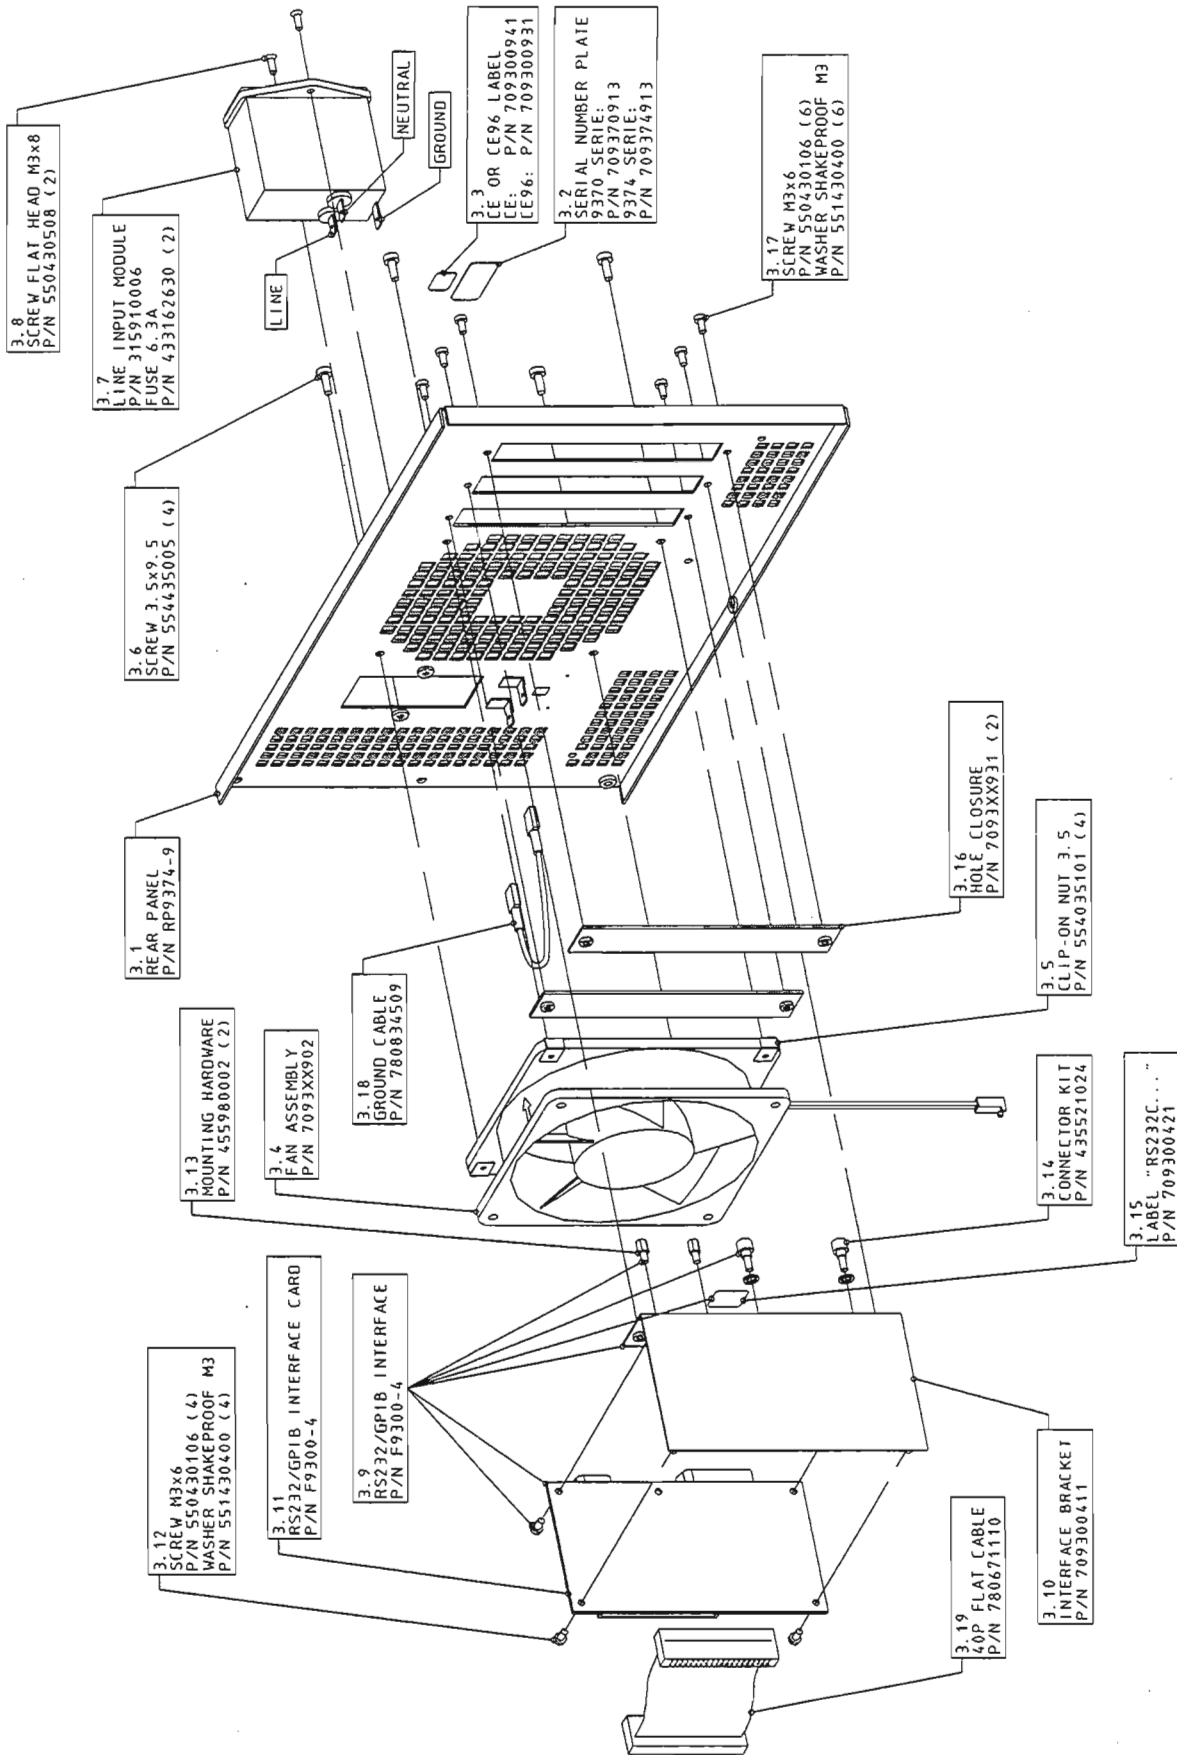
9374/M/L/TM Rear Panel Assembly
